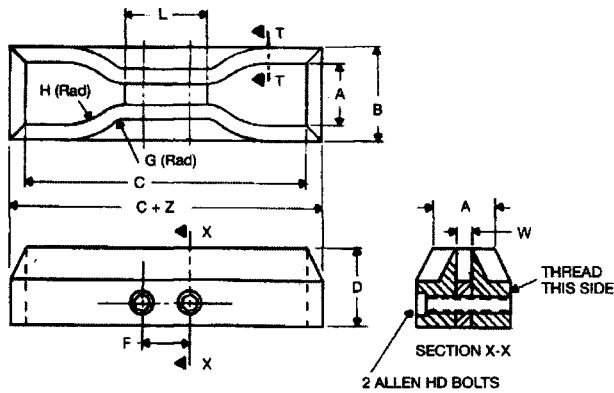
Standard Dies for Cutting Dumbbell Specimens
